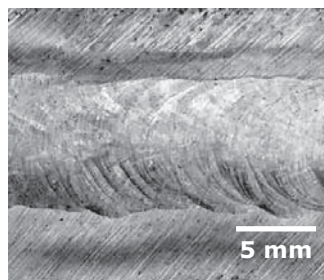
A bead appearance protruded on the reverse side of the root pass weld with argon gas back shielding
